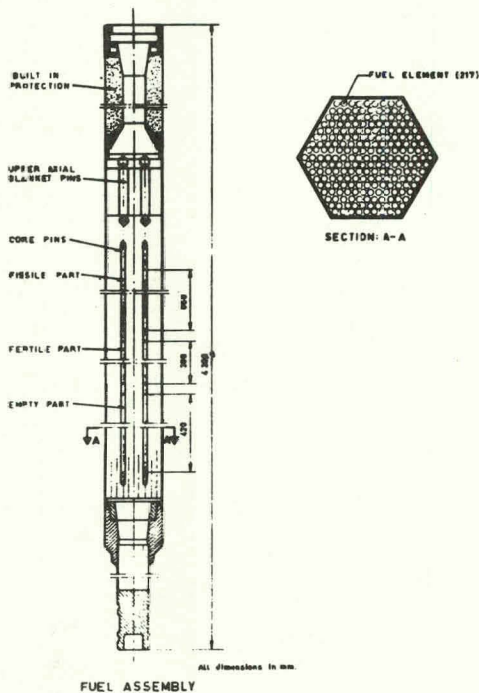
Fast Breeder Reactor Fuel Assembly
